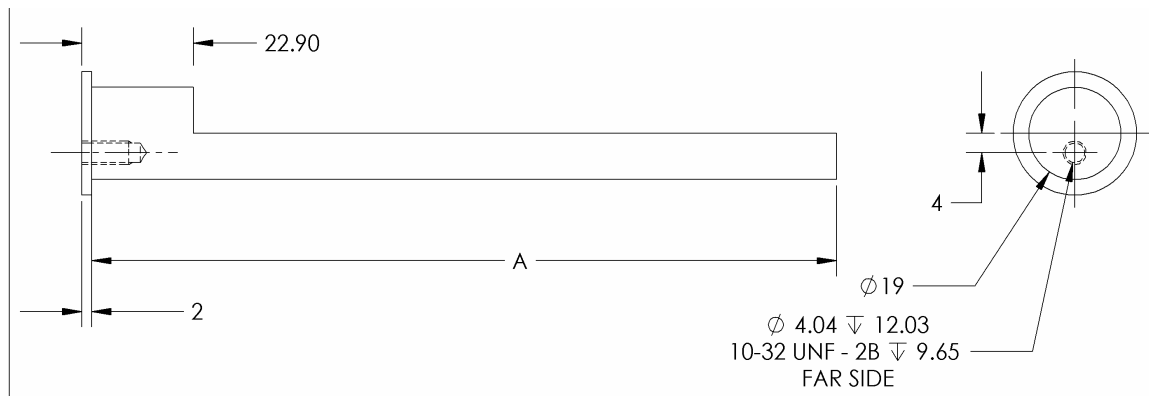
Machining Drawing for Dead Block, with Dimensions in millimeters
